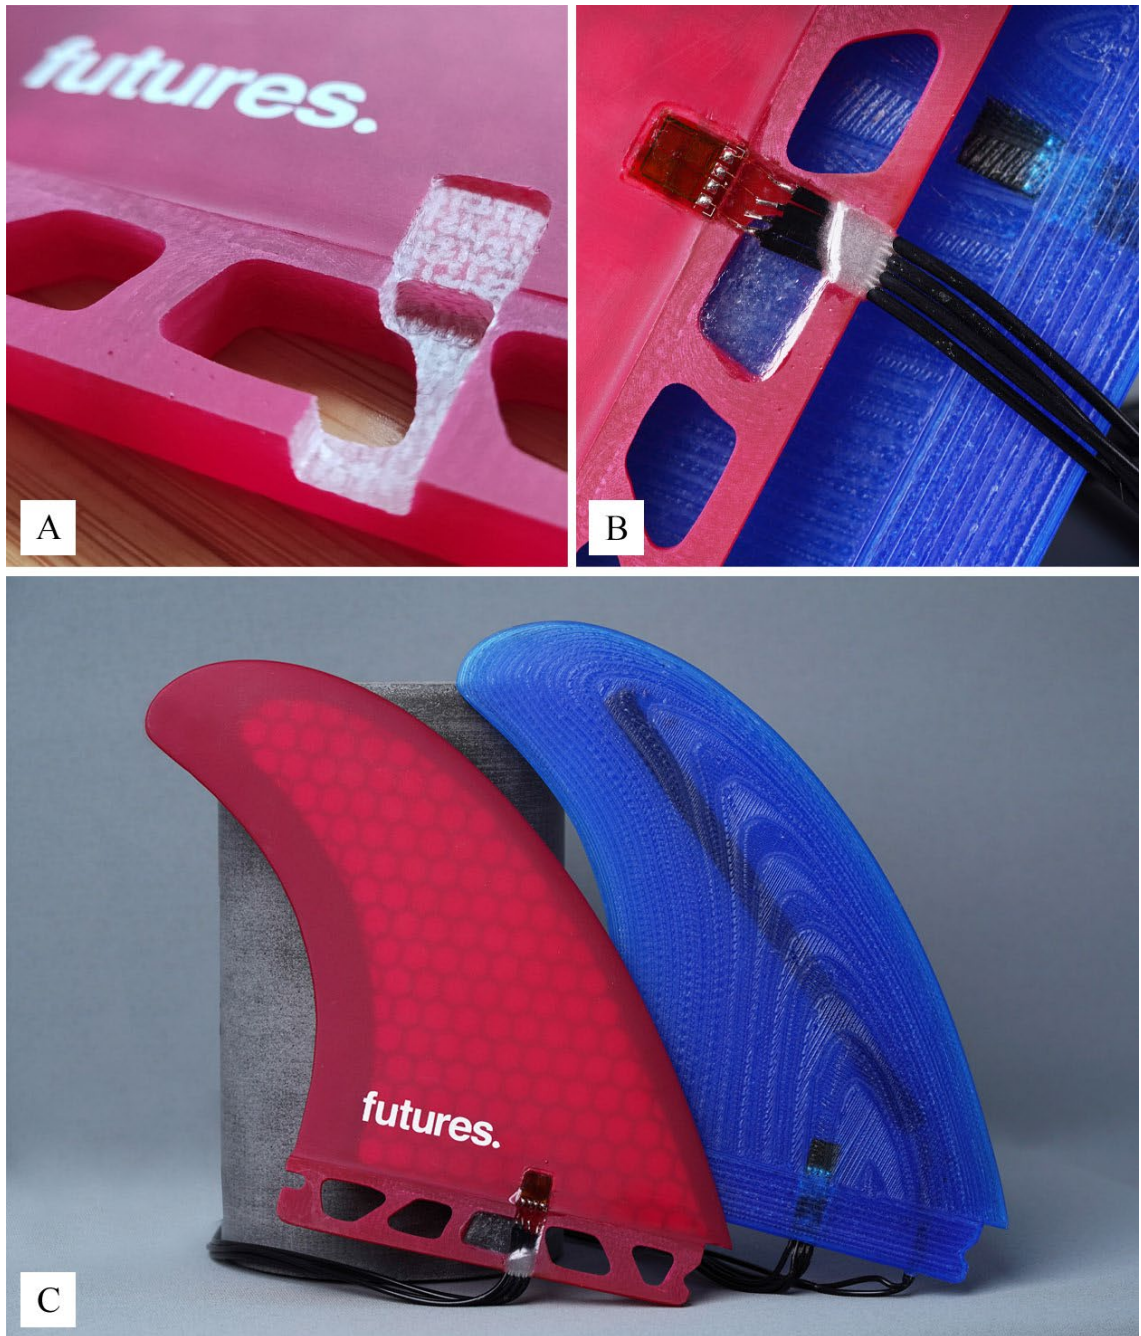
Picture of commercial and 3D printed fins. A) CNC machined pocket for a sensor. B) close up of two sensors. C) both fins.
